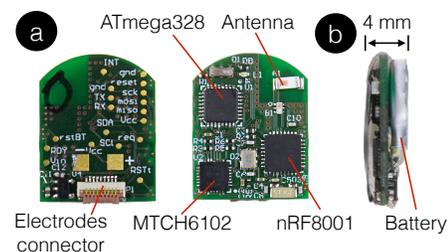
(a) PCB top, bottom. (b) side view of NailO's 4 layers.
